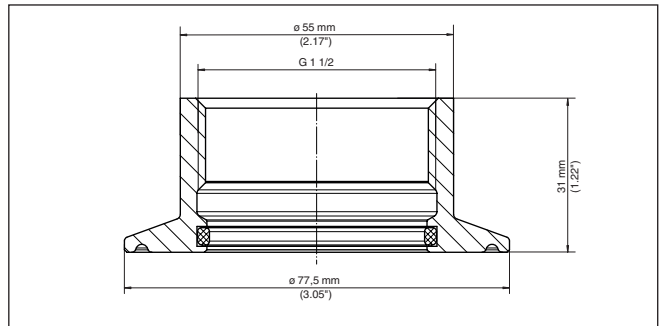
Dimensions of threaded adapter G1½ (DIN 3852-X) on Clamp 2½" (DIN 32676, ISO 2852) PN 16
